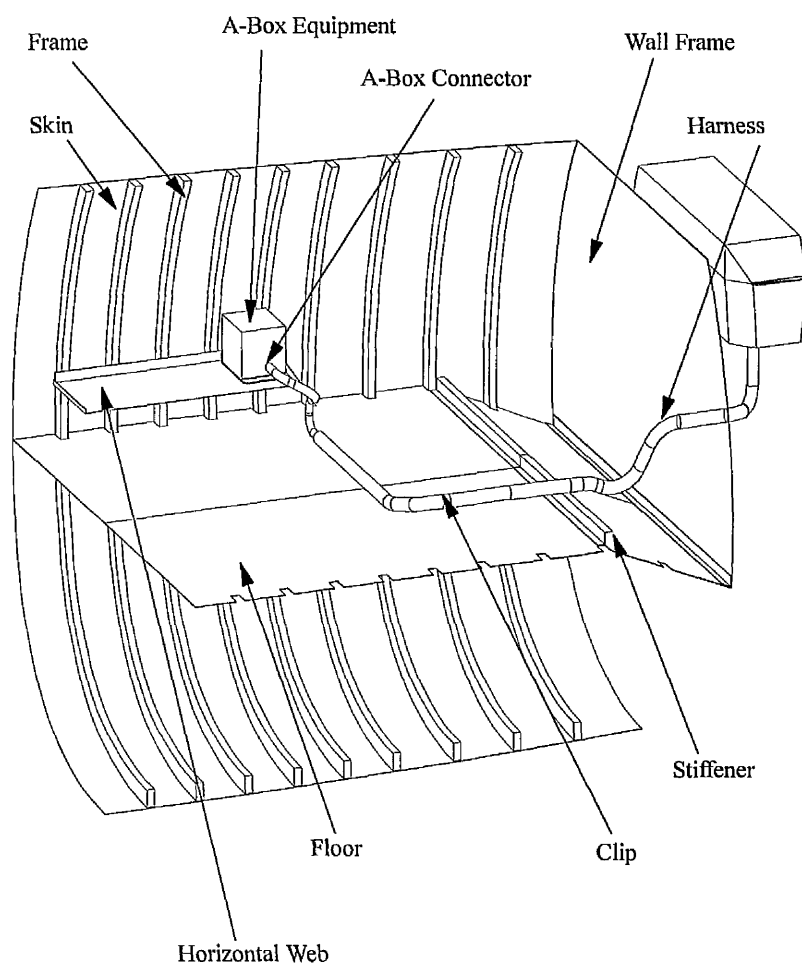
Typical Assembly with Structural Parts, Equipment and Wiring Installation
